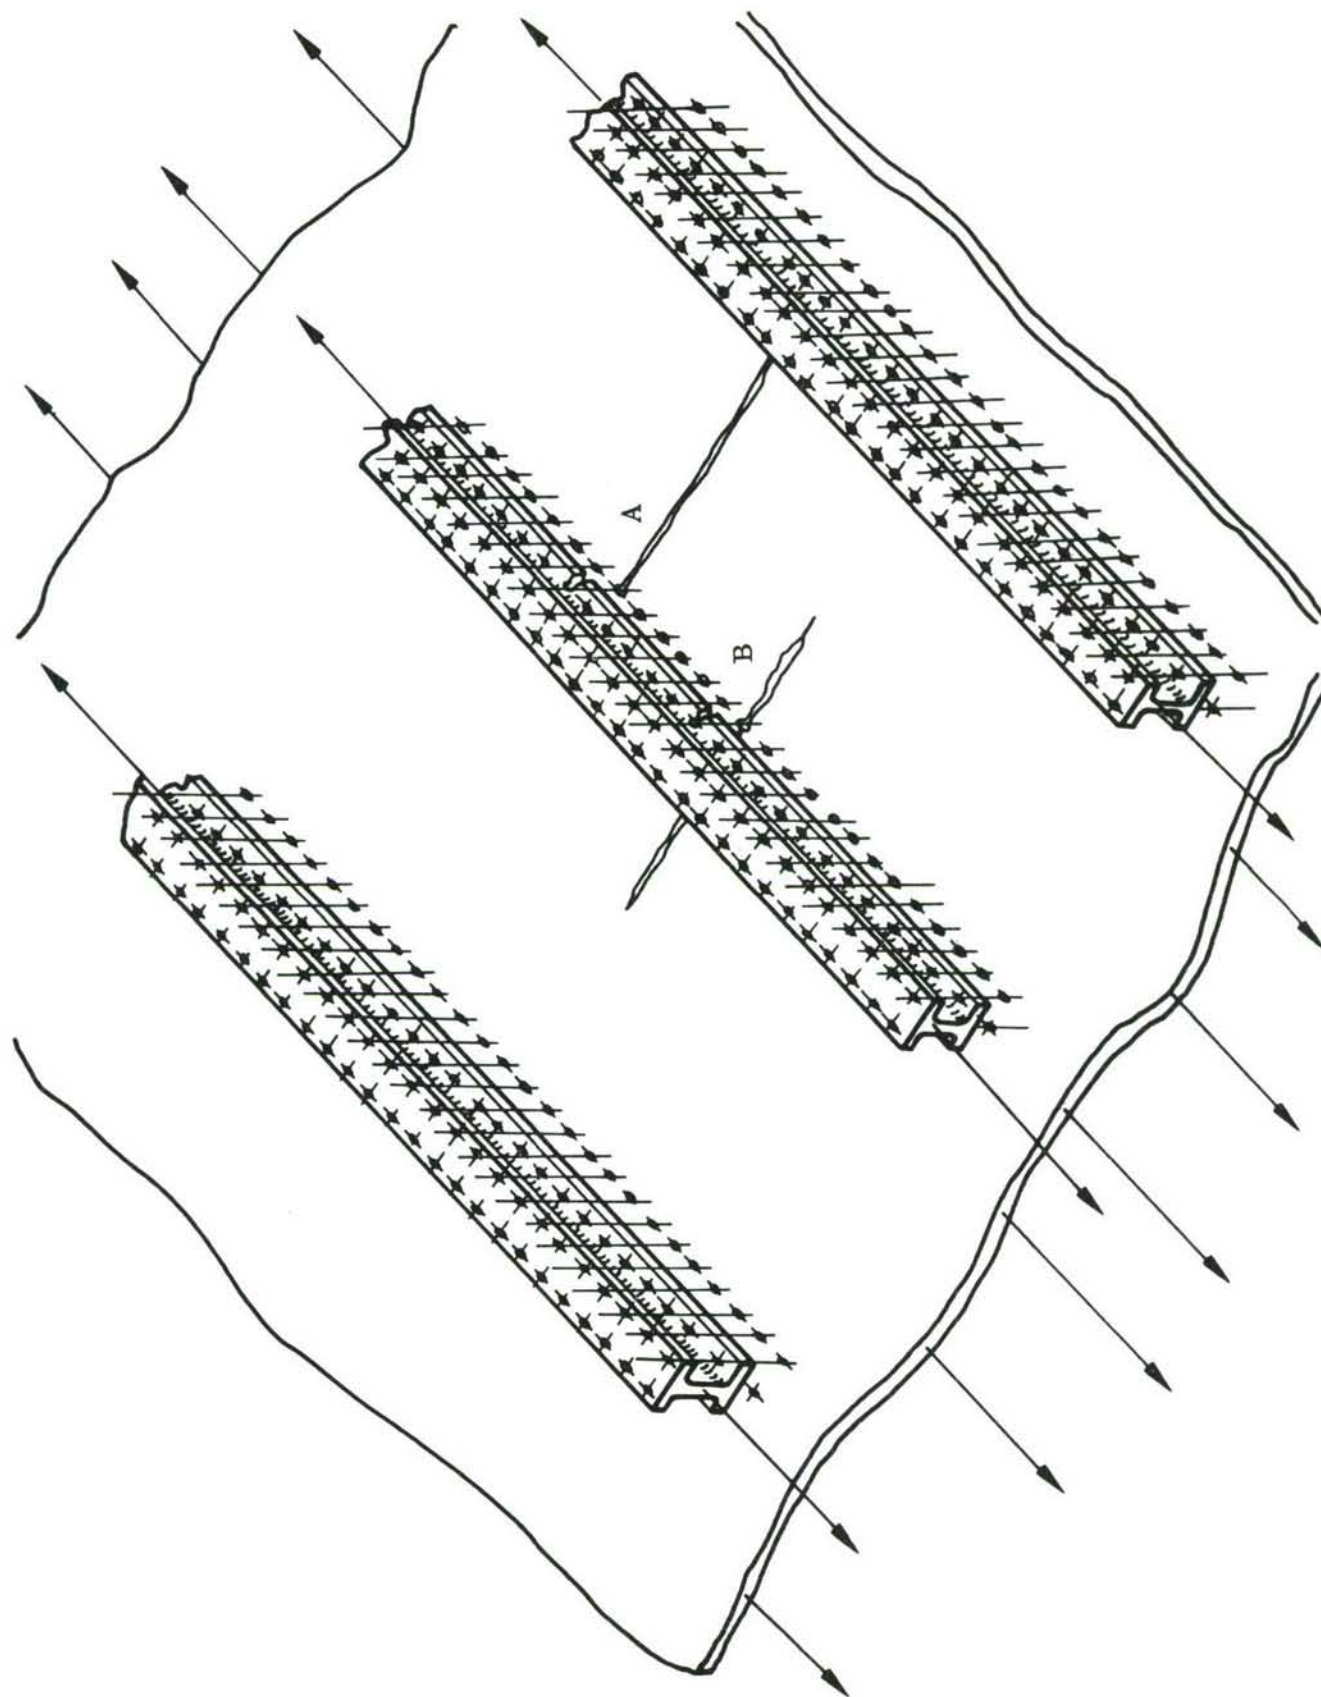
TYPICAL MULTI-BAY CRACKS IN TENSION STRUCTURE
